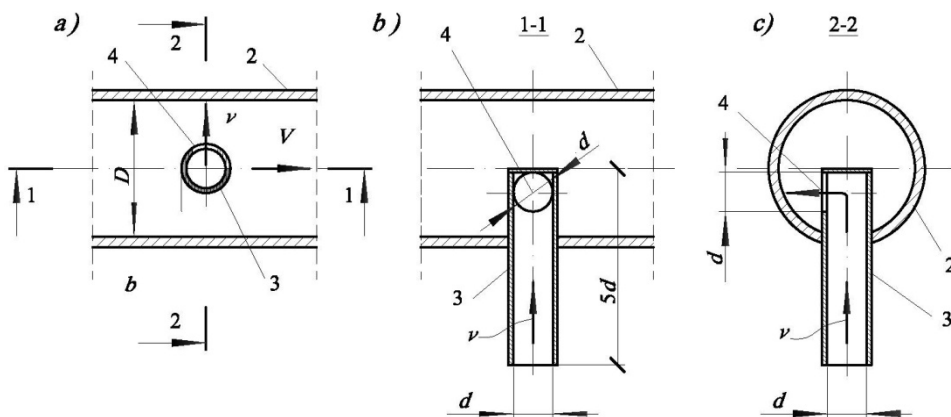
Schematic-diagram of attachment of inner-nozzle with orthogonal lateral jet outlet: a – longitudinal section of receiving tube; b – section 1-1; c – section 2-2; 1 – pipe closer; 2 – receiving tube; 3 – nozzle; 4 – outlet hole
